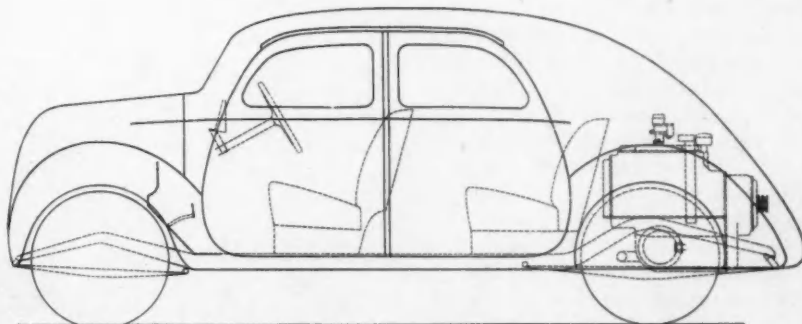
Rear-engined car with a Vee-eight engine over the transmission and differential. (This installation also is not well adapted to front drives, because the hood required would be too high for good visibility)
